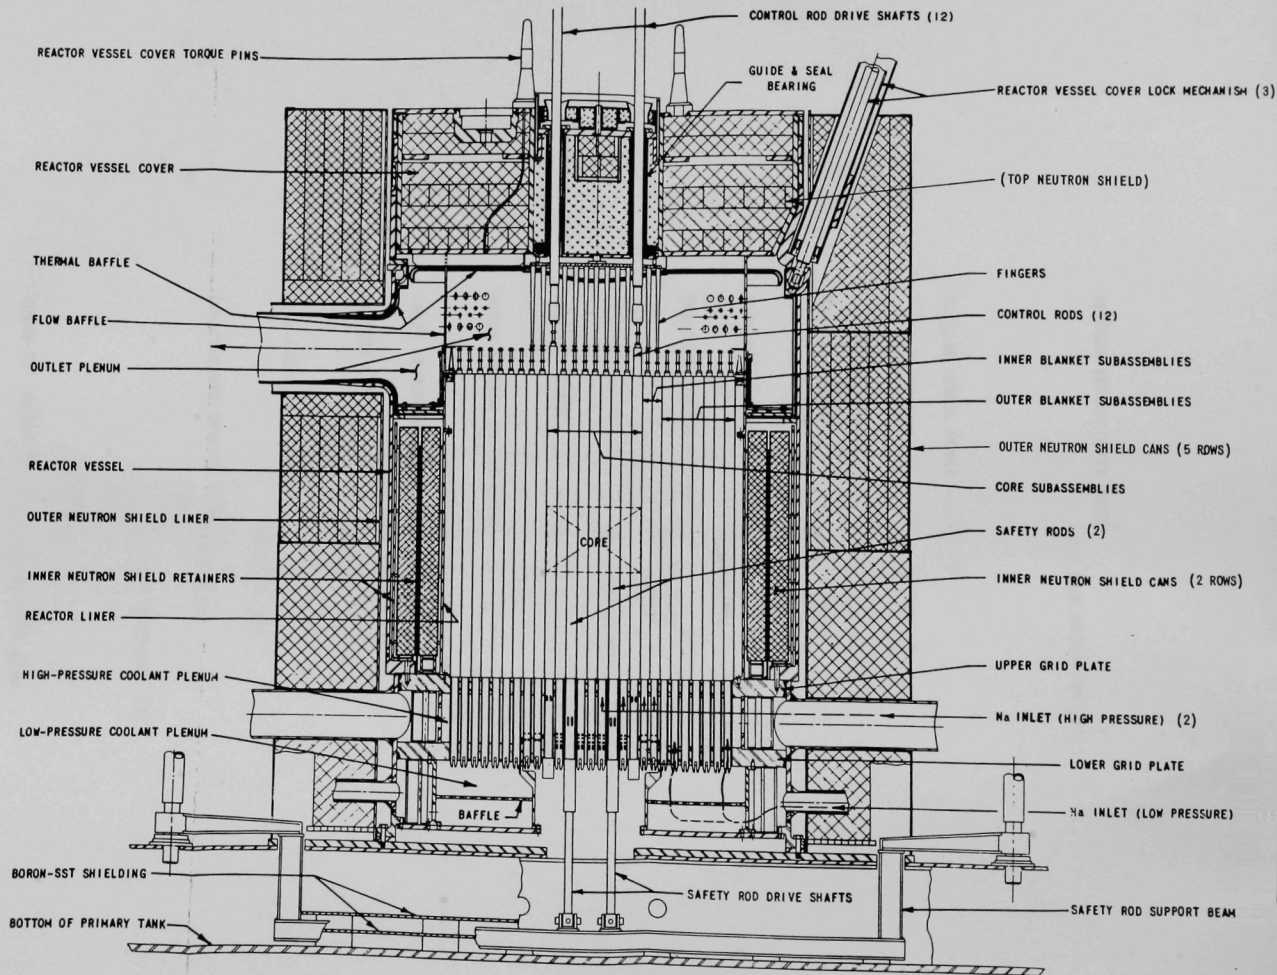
Reactor Vessel and Neutron Shield Assembly
